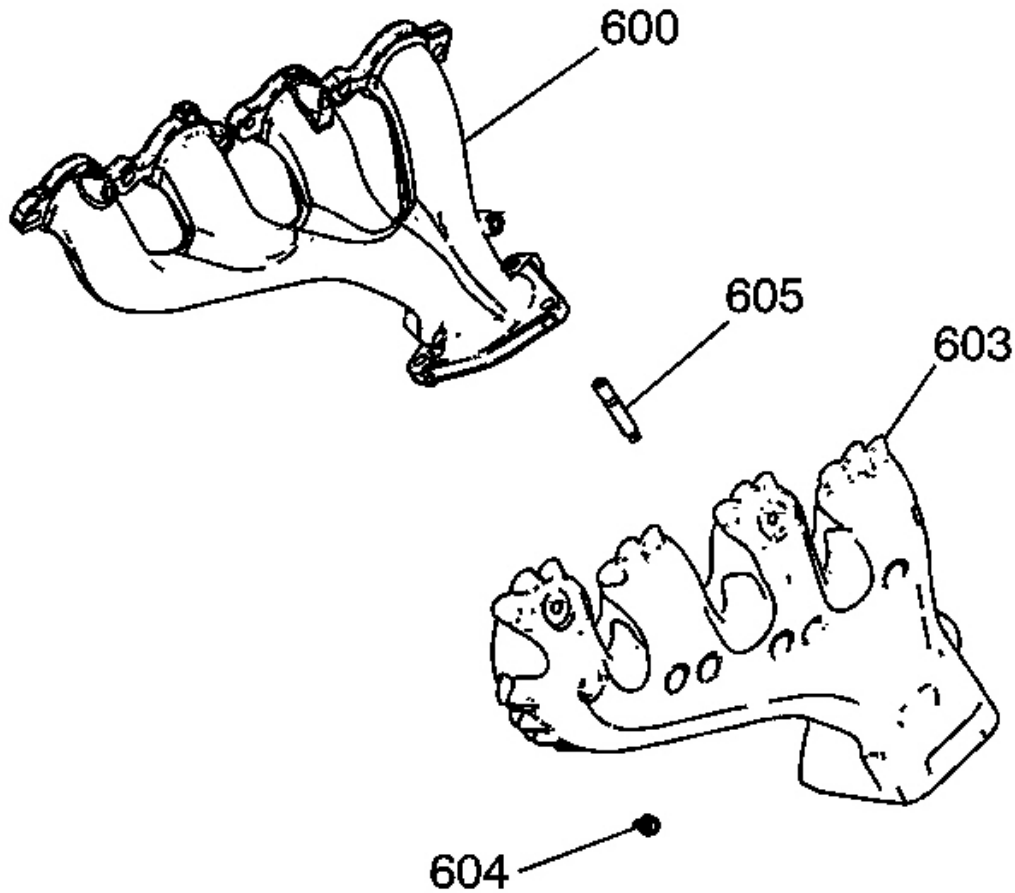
View Of Left Exhaust Manifold & Heat Shield
